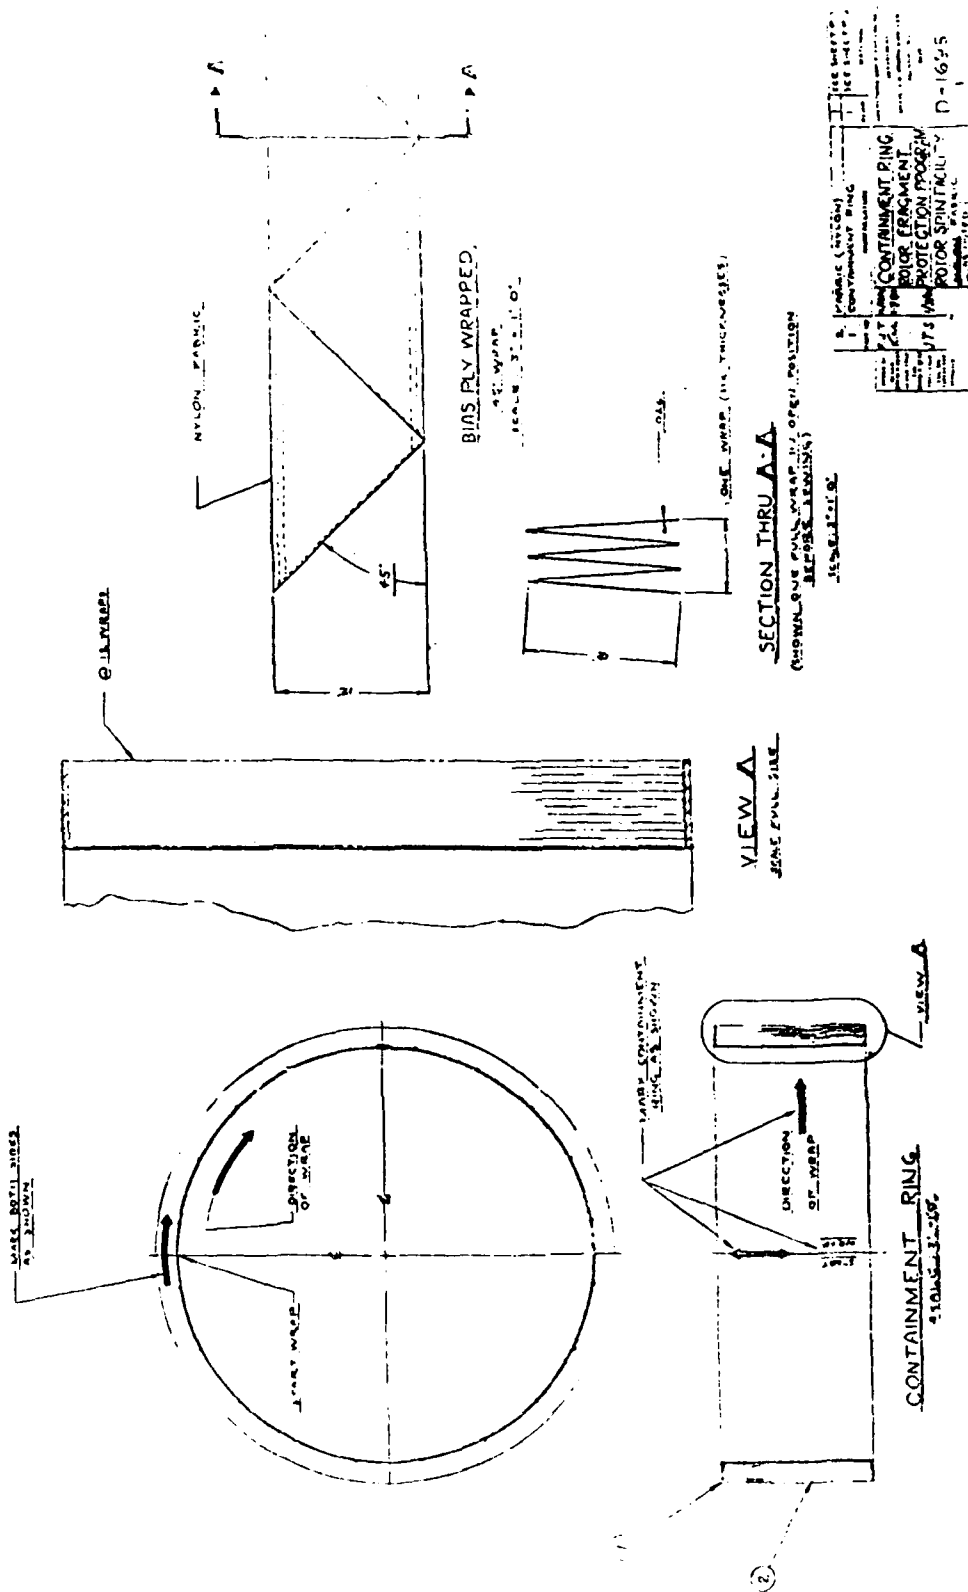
NYLON CONTAINMENT RING MANUFACTURING DRAWING (1 OF 3)
